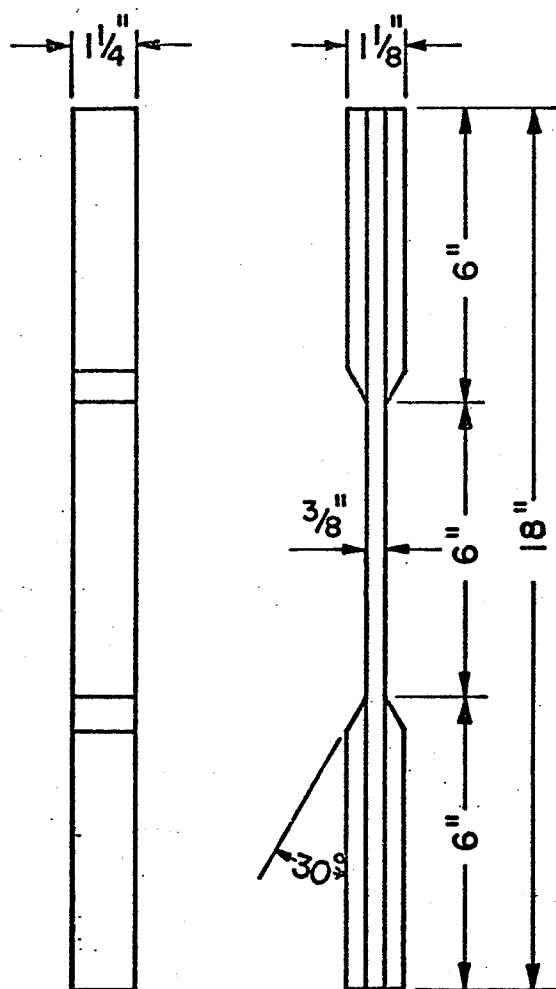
Details of Fiberglass Specimen for Tension Test Parallel to Surface.
